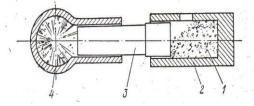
Drawing of a high speed press for briquetting: 1 – waste; 2 – container; 3 – piston; 4 – explosion chamber
